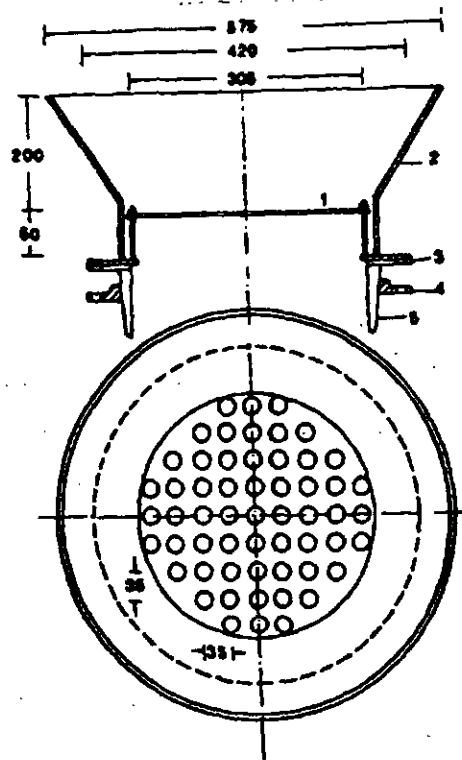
D. Design details of the diverger section at the top end of the 0.305 m diameter slurry bubble column. (1) stainless steel perforated plate, (2) diverger section, (3) gaskets, (4) flange, and (5) glass column. All dimensions are in mm.
